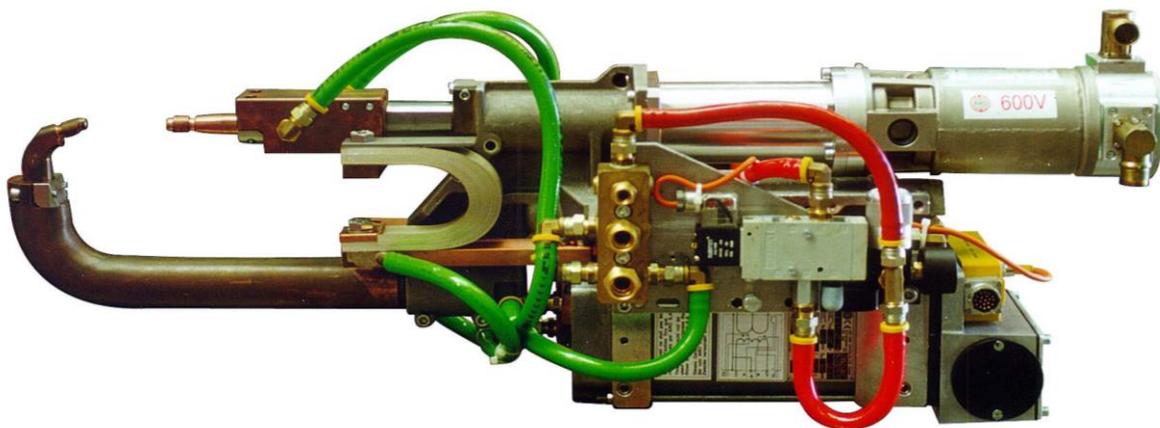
Resistance Spot Welding Gun. Source: TWI
